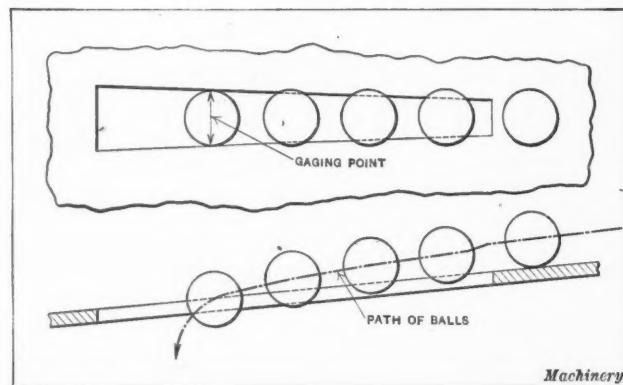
Principle on which Balls are sorted in a Ball-gaging Machine
